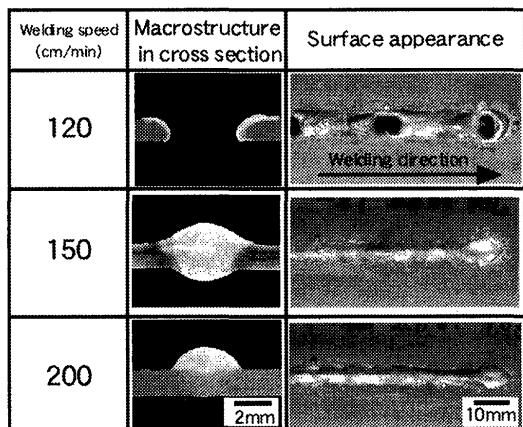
Bead appearance and macrostructure in cross section of weld bead at welding current of 80A.
